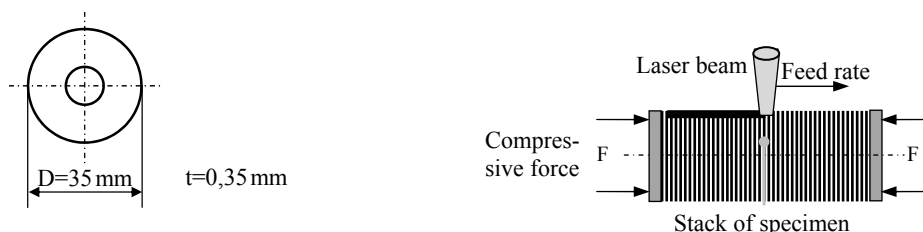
Experimental investigation of the welding process, left side: design of the specimen; right side: experimental set up
